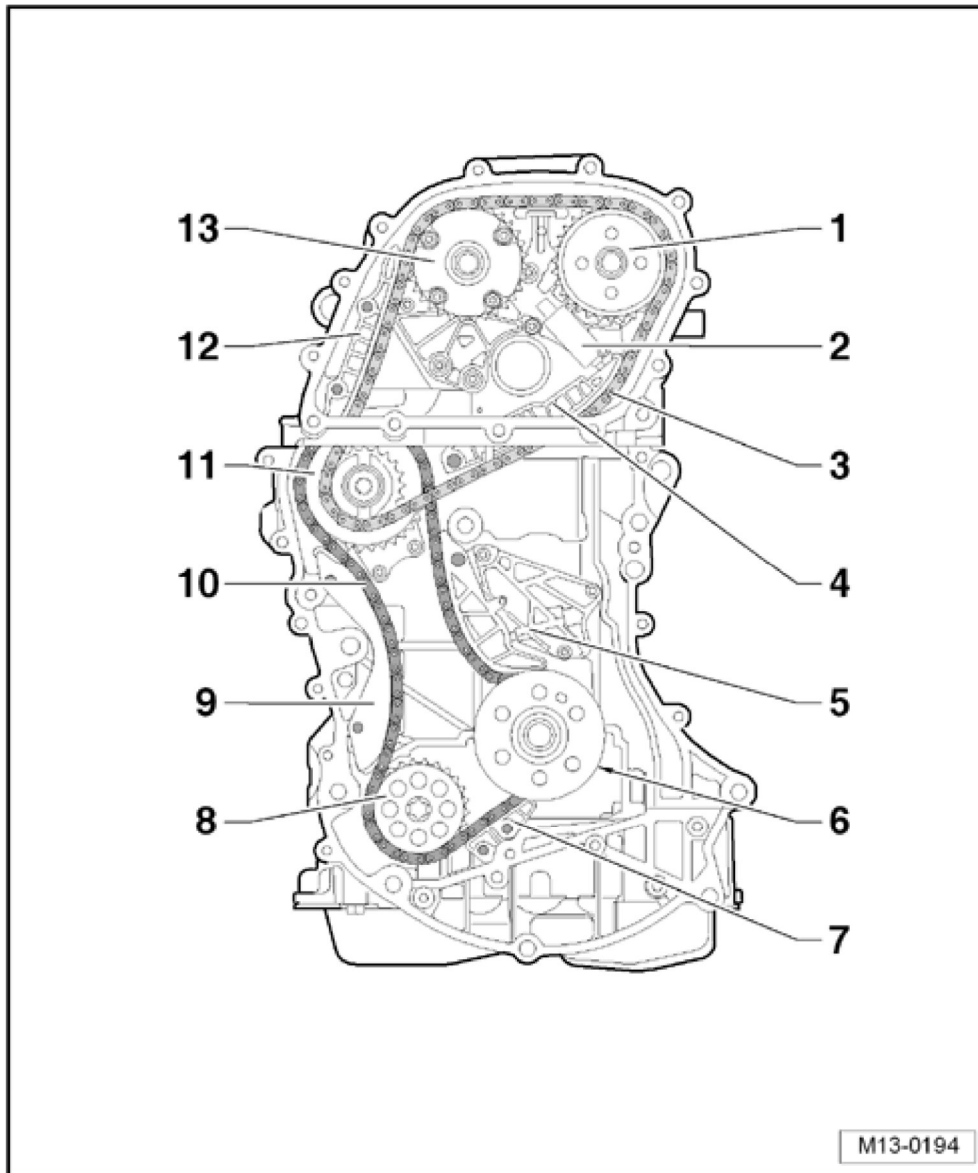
Identifying Chain Drive, Assembly Overview - Part I, II, III
